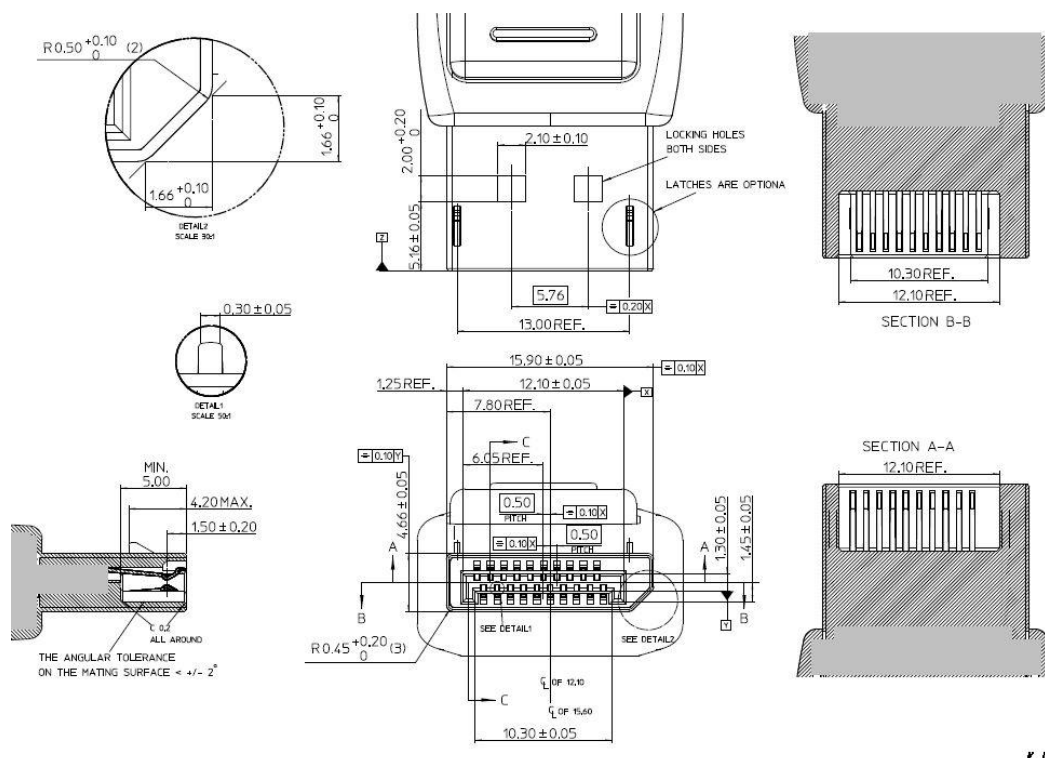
DisplayPort External Cable-Connector Assembly Drawings
